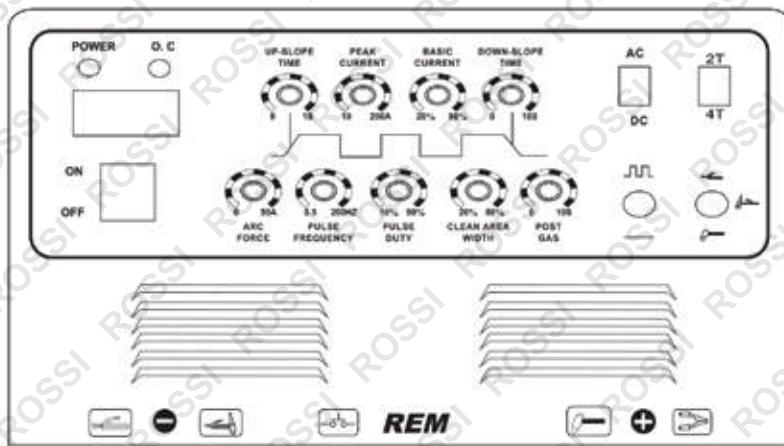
The front panel structure of SUPER (P) Series and AC/DC series welding machine
